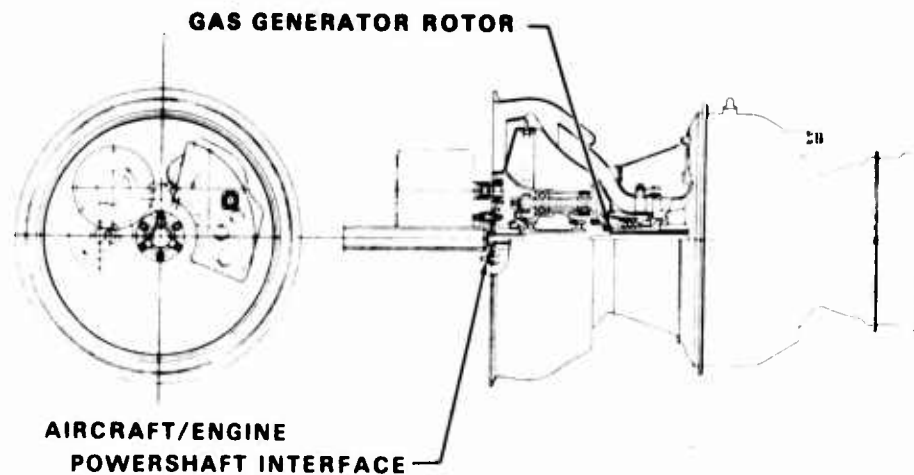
Candidate C&A Drive (Cluster Gearbox Drive)
